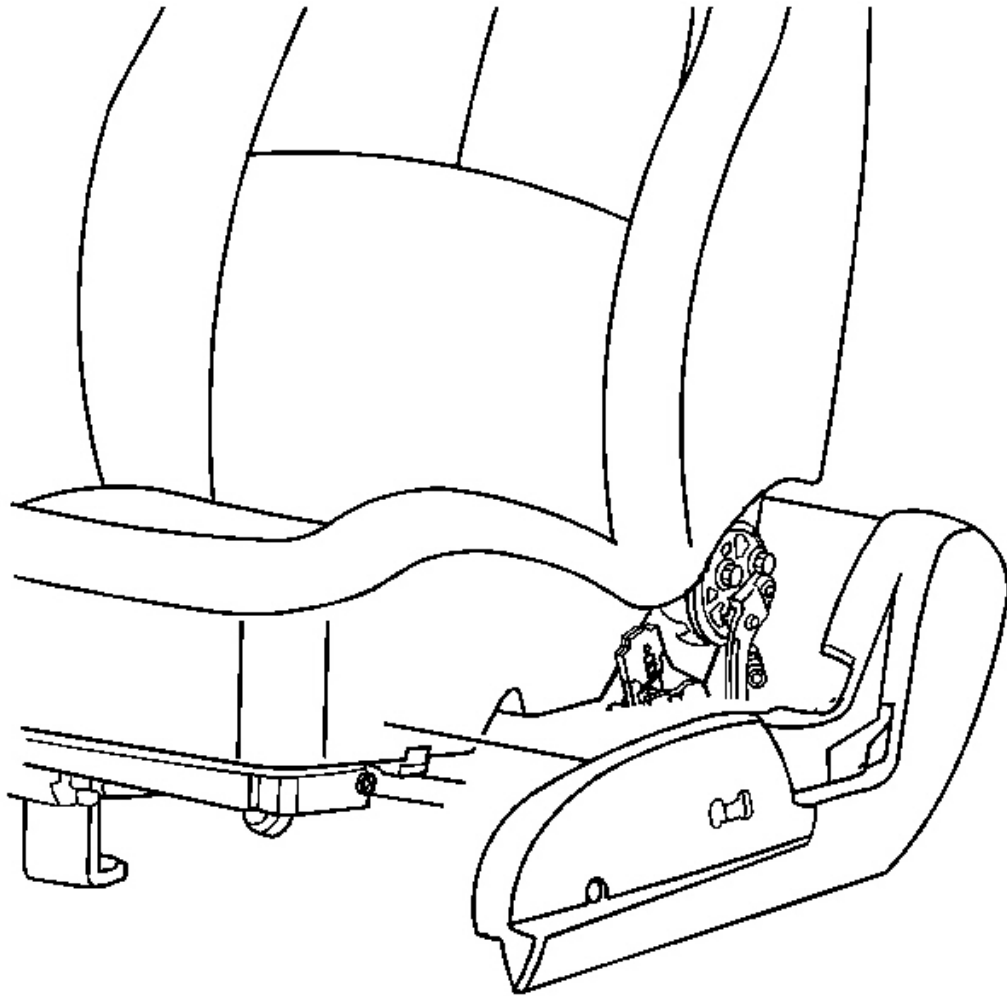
View Of Seat Cushion Outer Trim Panel - Front Seat (6-Way)
